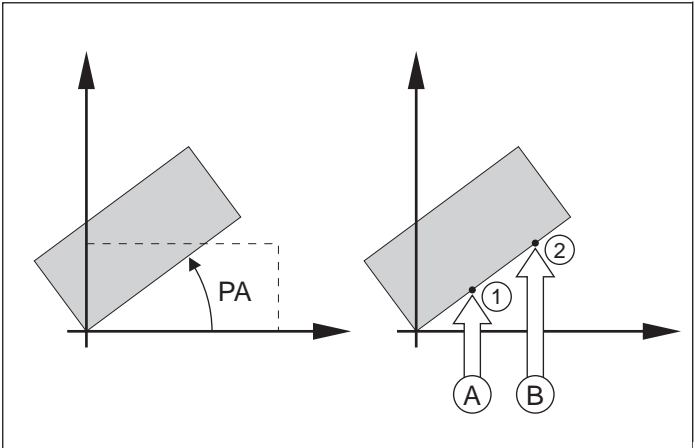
Basic rotation of a workpiece, probing procedure for compensation (right). The dashed line is the nominal position; the angle PA is being compensated.
